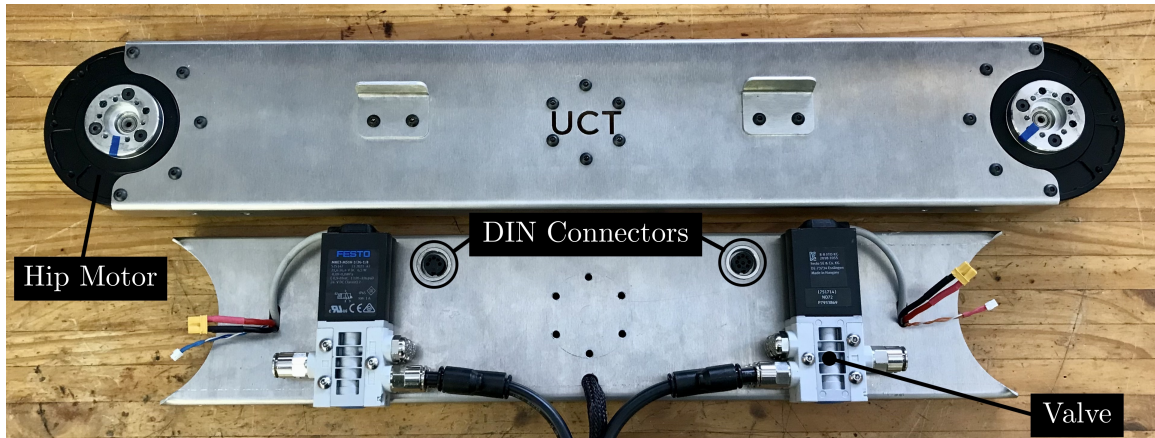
Sheet metal halves which make up the front (Top) and back (Bottom) of the body with mounted hip motors, solenoid valves, and signal DIN connectors.
